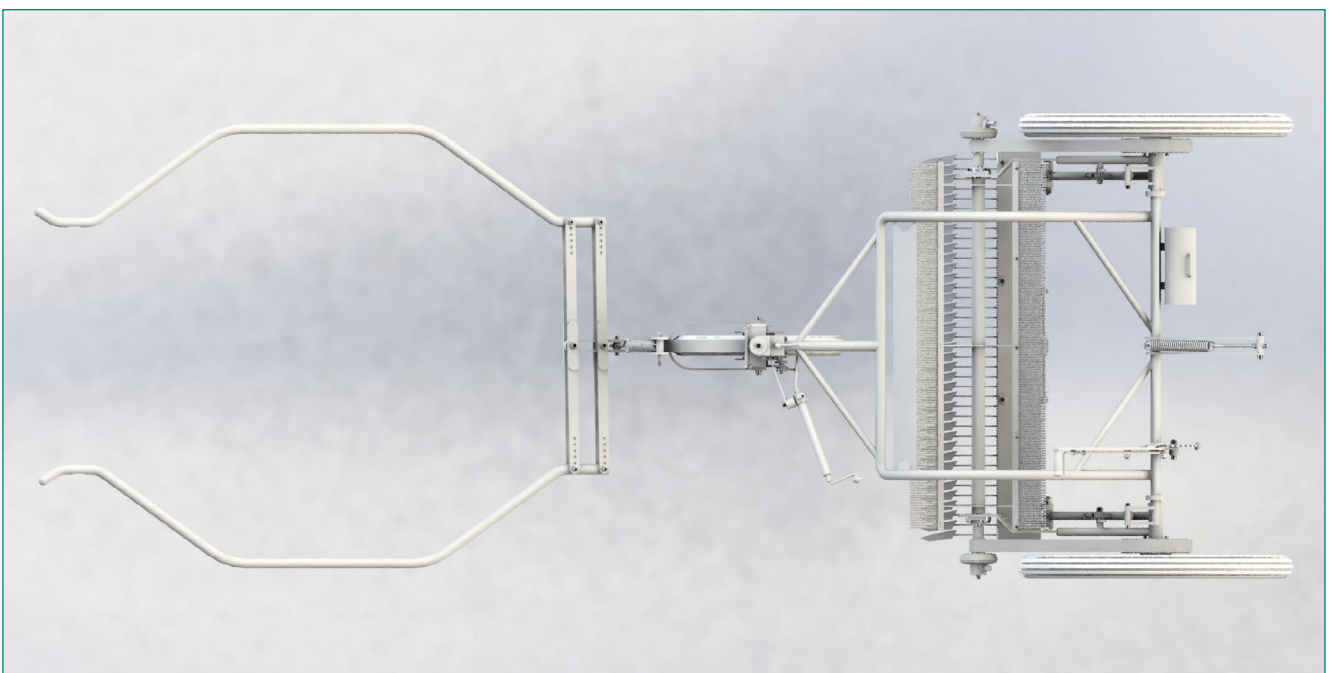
Top view of the horse drawn CombCut coupled to the forecart
